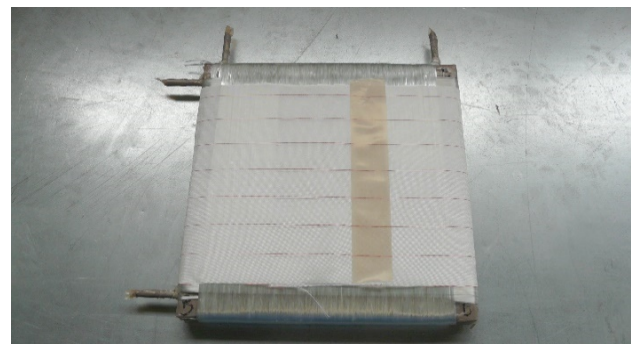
peel ply taped at the bottom side and covered threaded ends.
